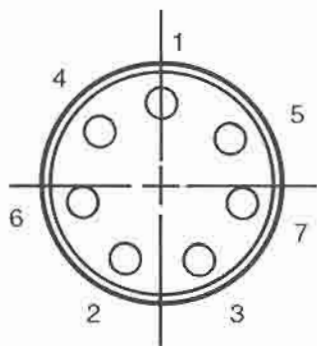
IMPELLER MOUNTING SCREWS TIGHTENING SEQUENCE
